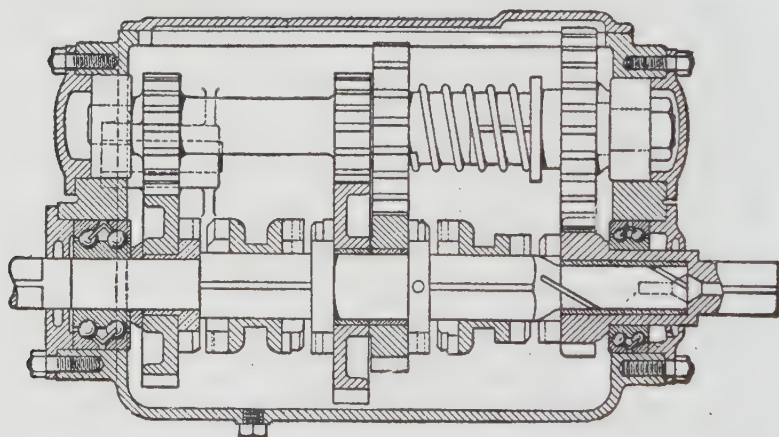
COTTA POSITIVE CLUTCH CHANGE GEAR.
